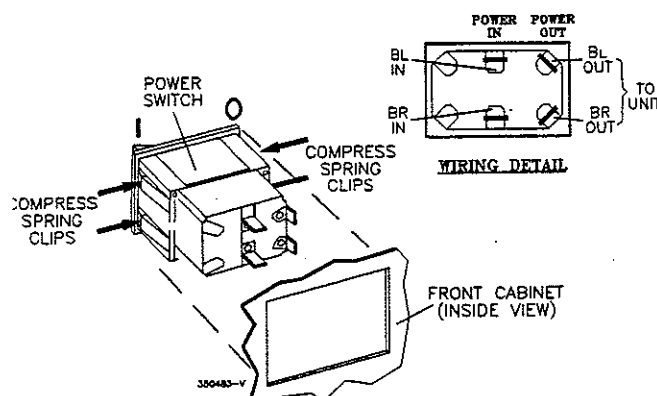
POWER SWITCH 1S REMOVAL
